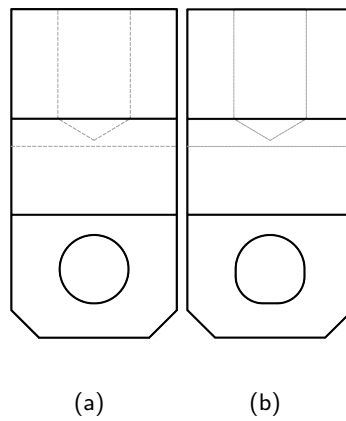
Circular clevis hole (a) and modified circular hole (b).
